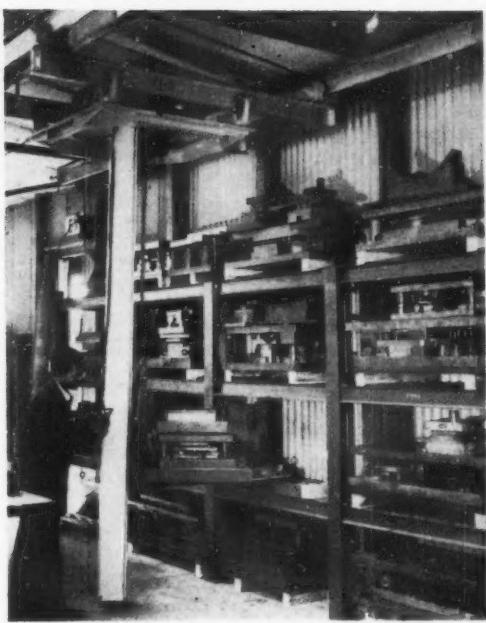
The New King Ski-Wracker Light-duty Stacking Unit May be Employed for Handling Fairly Large Press Tools as Here Shown
